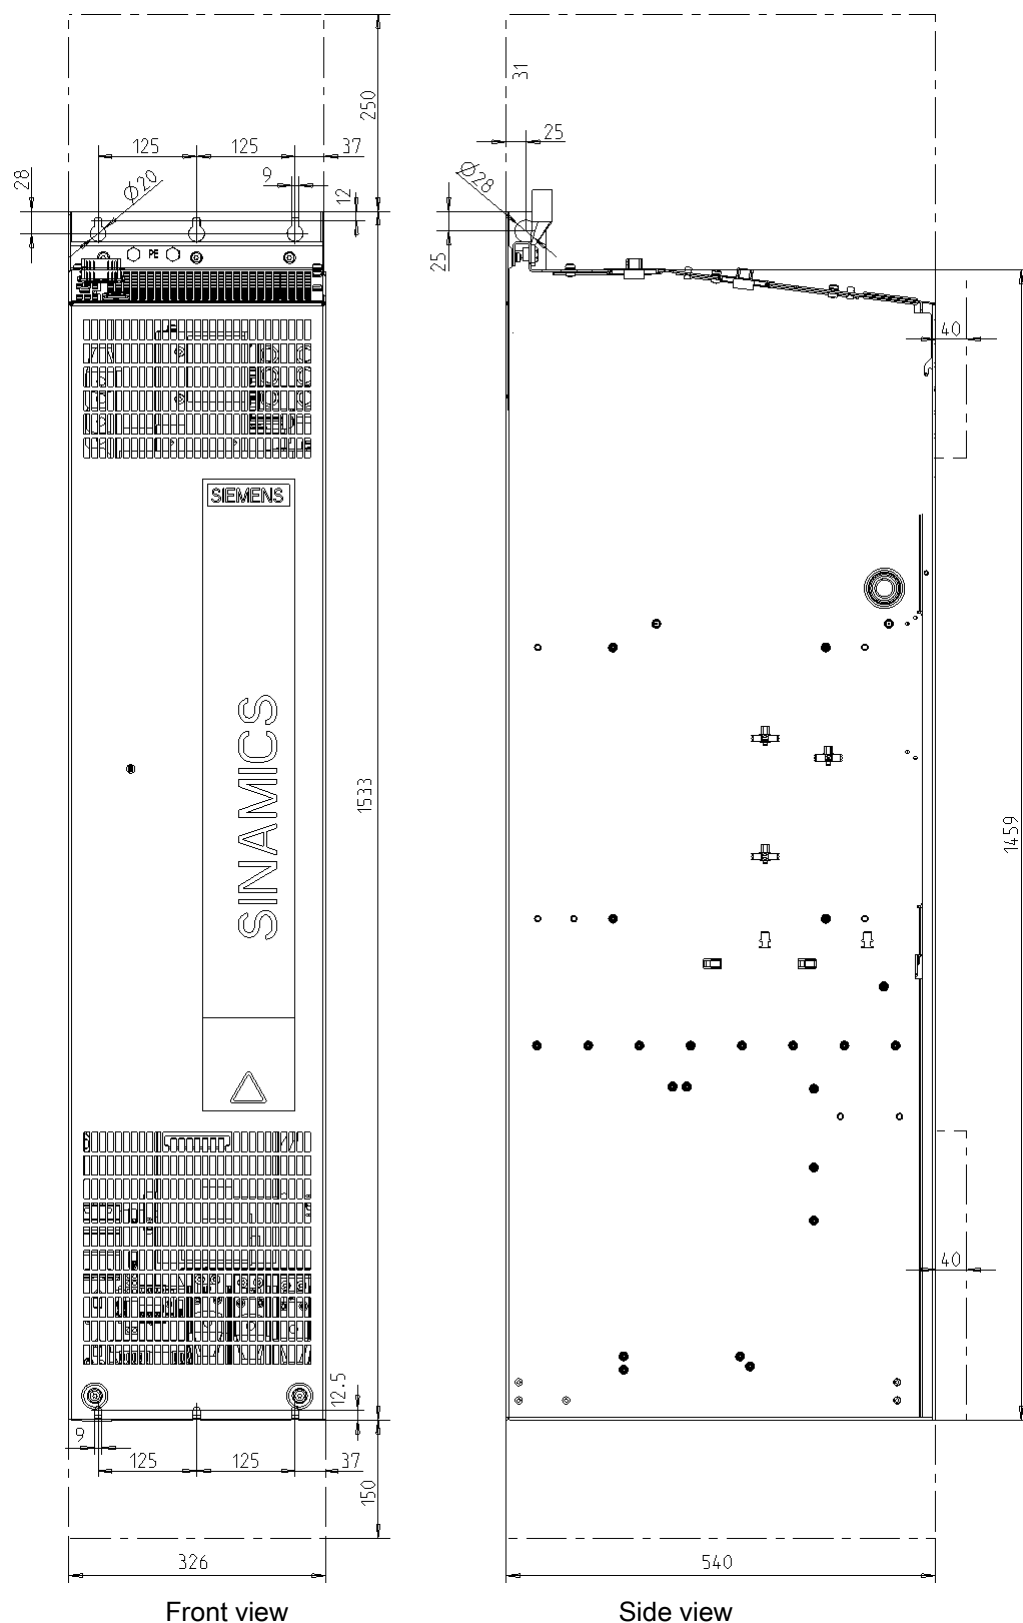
Dimension drawing of Active Line Module (type GX)
